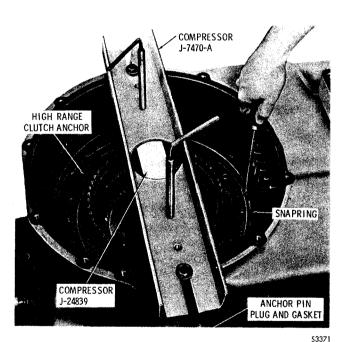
Installing high-range clutch anchor assembly snapring
